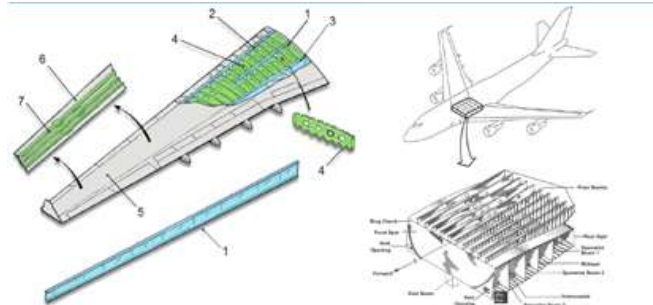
Left: Construction of a commercial aircraft wing box: 1. Center spar, 2. Front spar, 3. Rear spar, 4. Rib, 5. Skin plate, 6. Underside of membrane, 7. Strings. Right: Constructive assembly of the plane's physical structure
